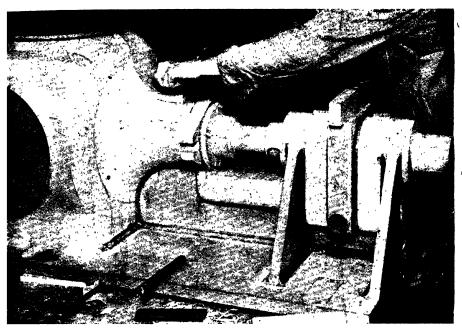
Planing off the face of a boss preliminary to marking correct shape Showing constructional details of a crankcase pattern when nearing completion. Note that the bosses are first fitted and affixed in a very rough shape, although the surface worked on is in its final form.
